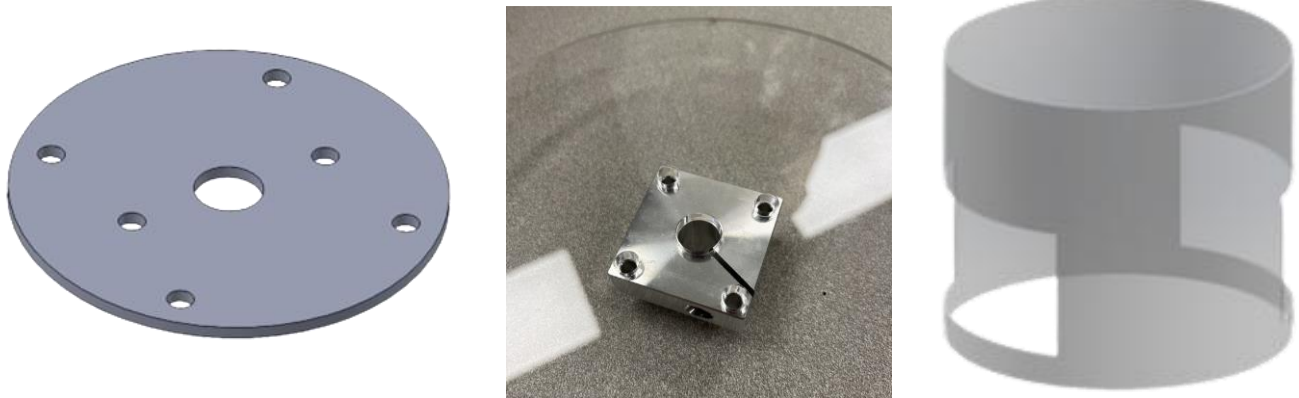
Fabricated metal plate CAD model (left); Attaching flange mount to top acrylic sheets (middle); Fabricated draft tube CAD model (right).
